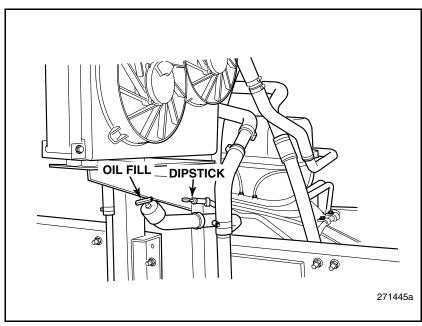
Cab Forward Chassis Oil Fill and Dipstick Location
